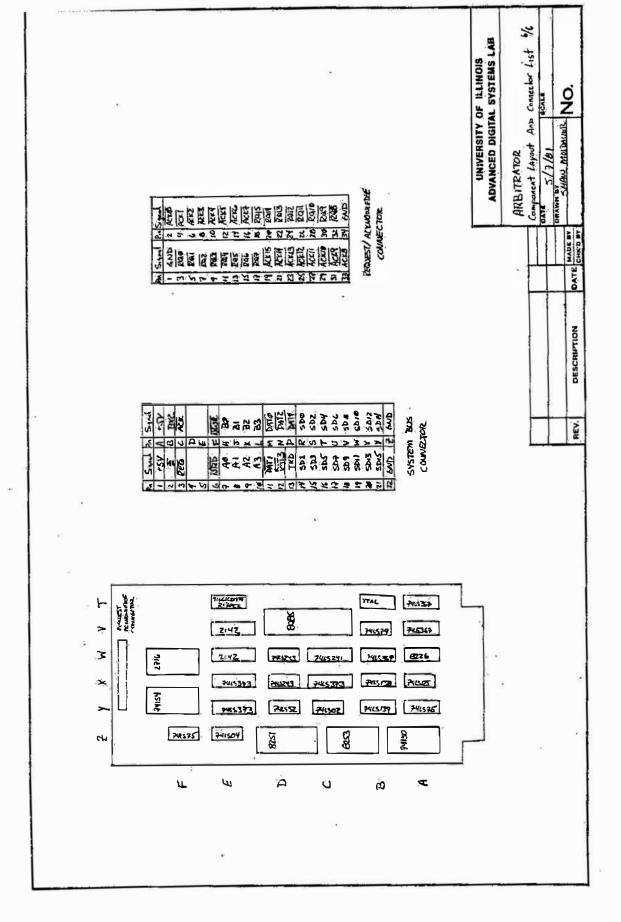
ARBITRATOR BOARD LAYOUT
